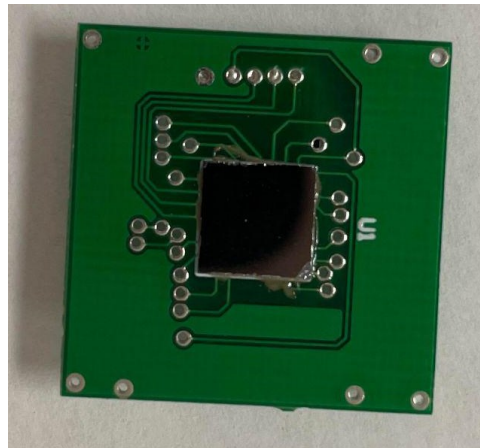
A PCB with the MEMS stress and strain sensor assembled in the middle
